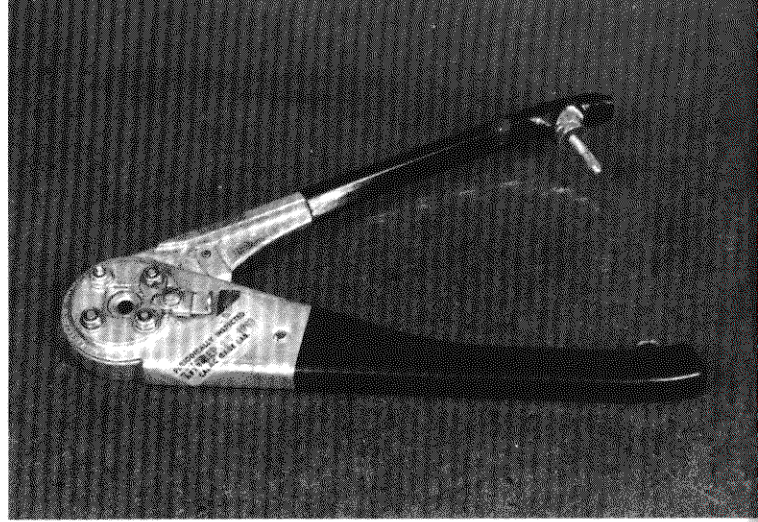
L525C19-3 Crimping Tool (Locator not shown)
